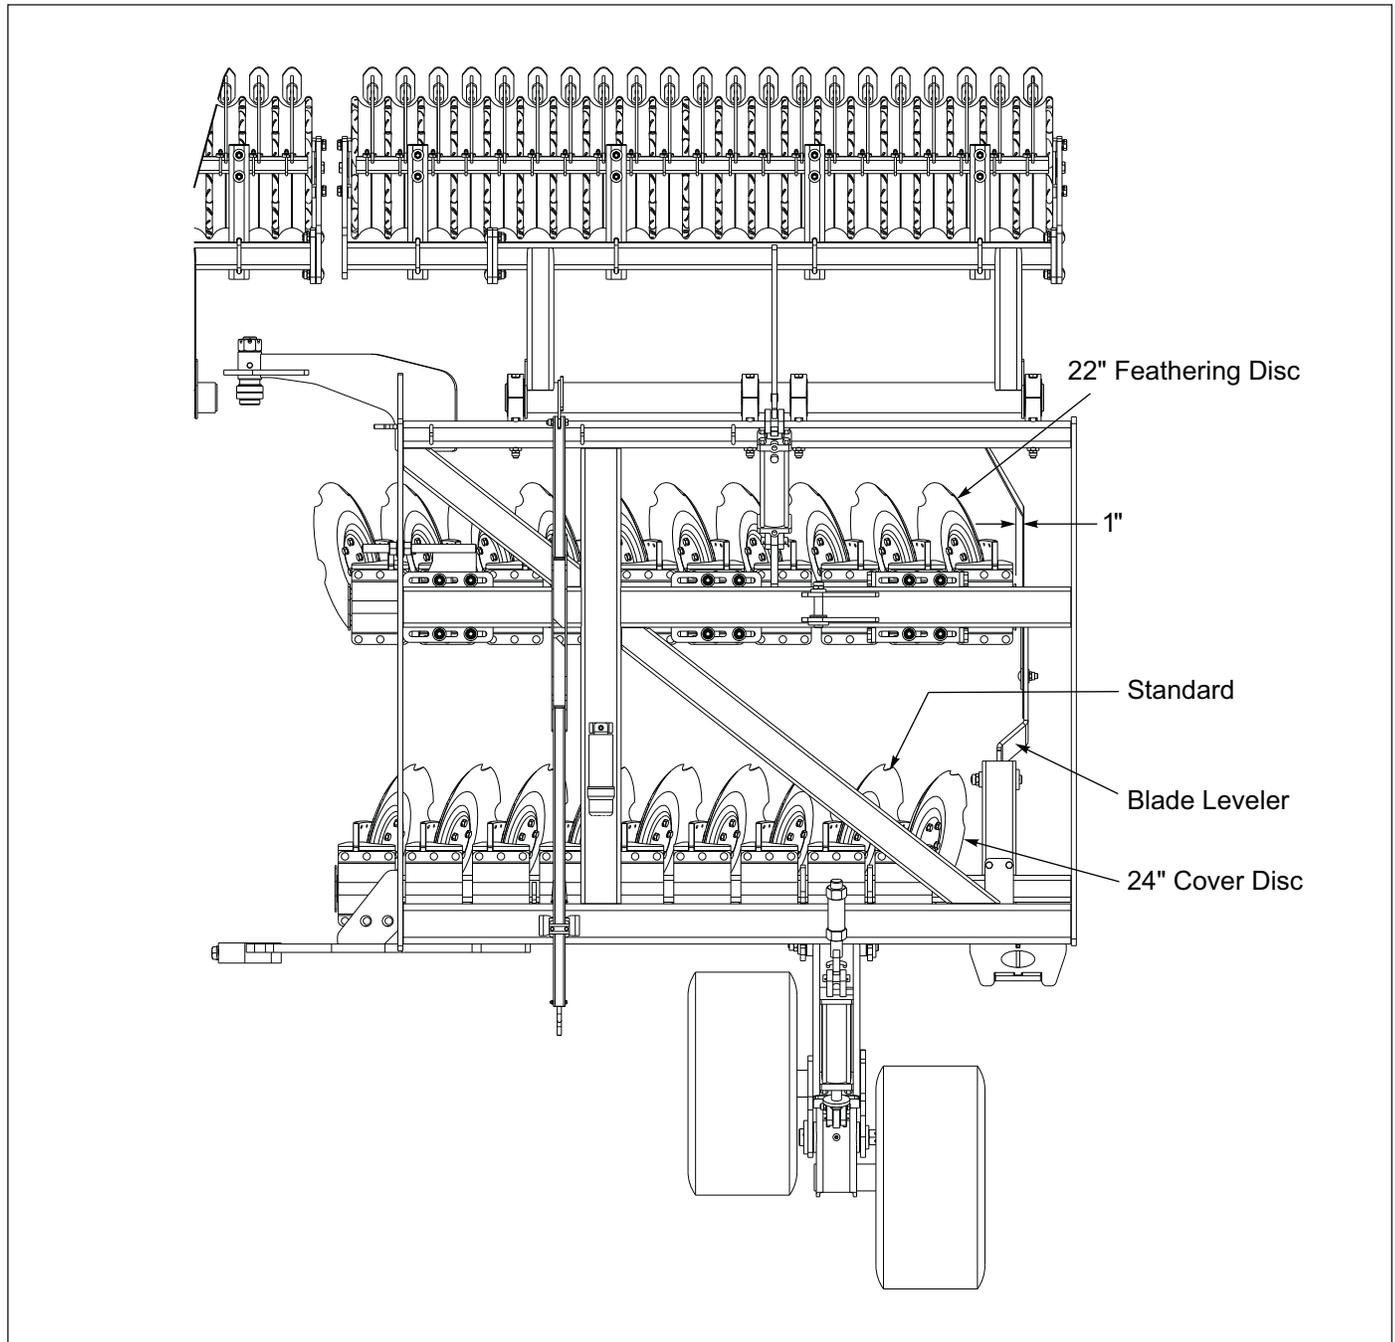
Adjusting the Blade Leveler (Compound & Shanks Shown)
